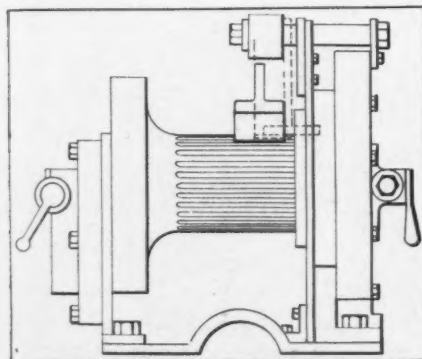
Illustrating end of toothed rack and toothed drum. Dotted lines indicate how lock drops over end of toothed rack, with locking pin in place.
